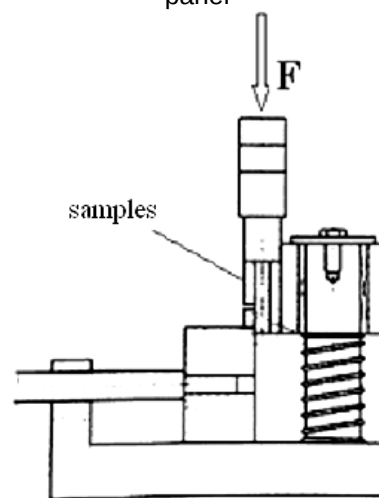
Adjustable shearing tool with test piece in position (side view) [24]
